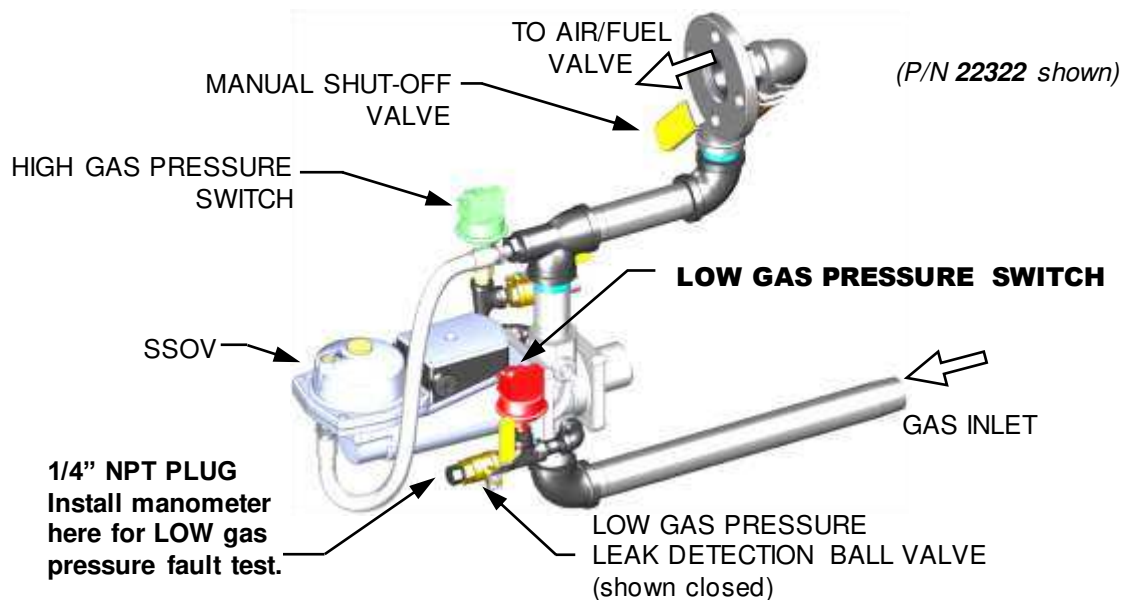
BMK750/1000 LOW Gas Pressure Test Components
